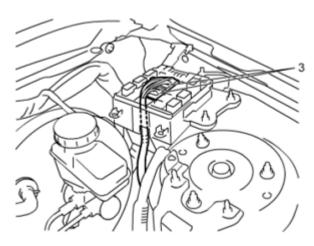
Identifying Relay Box Courtesy of SUZUKI OF AMERICA CORP.
